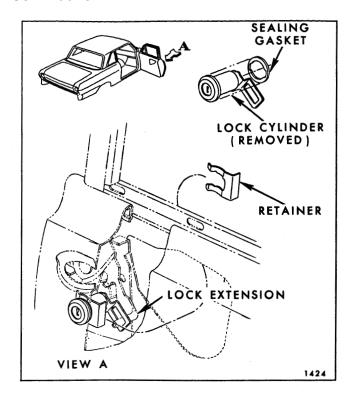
Front Door Lock Cylinder Removal – "X" Styles Shown – Others Similar
